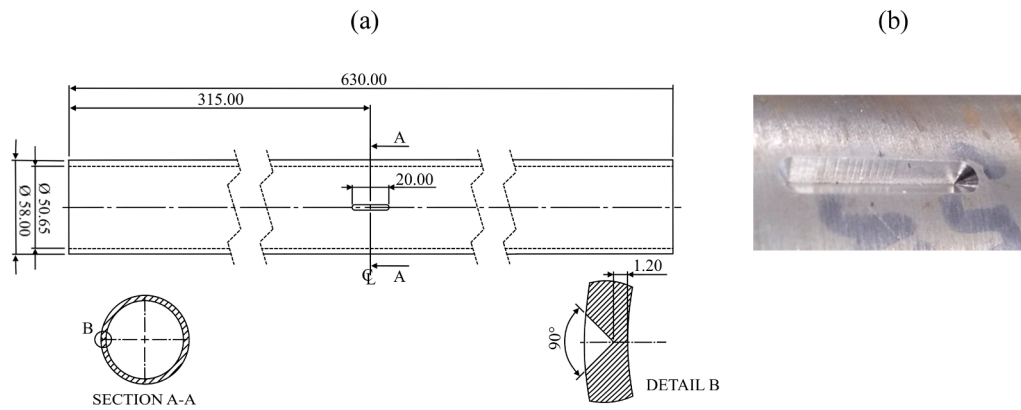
(a) Dimensioned drawing of the axially notched cast iron pipe specimens tested under bending and internal pressure fatigue loads (dimensions in mm, not to scale) and (b) an image showing a close-up of an axial pit as machined.
